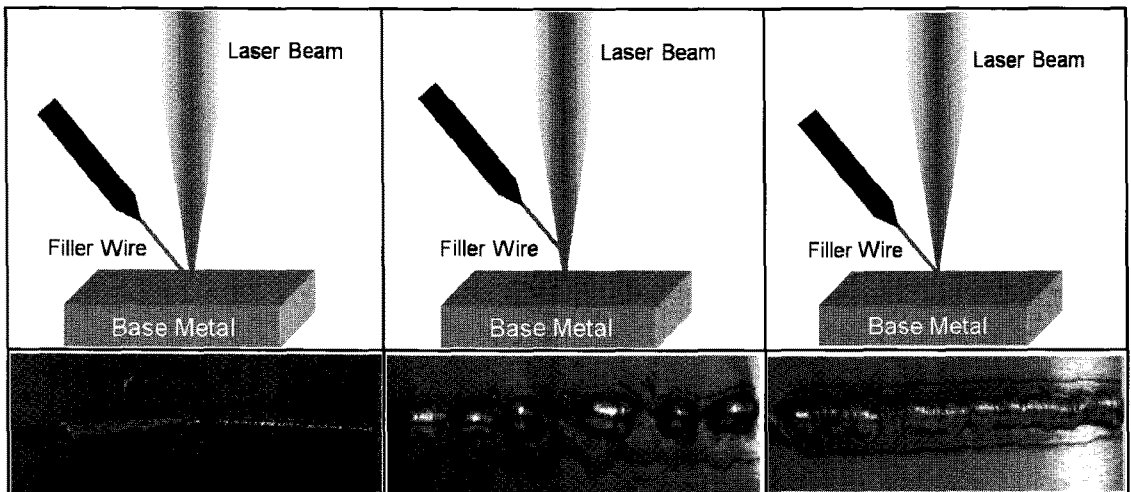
Schematic illustration showing the wire feed and laser beam arrangement ; (a) wire supply after melting of base metal, (b) repair welding after melting of wire and (c) at once repair welding with wire and base metal
